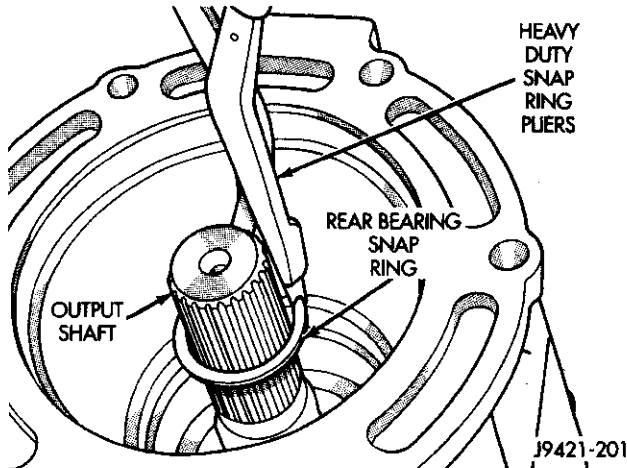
Rear Bearing Snap Ring Removal—4WD
